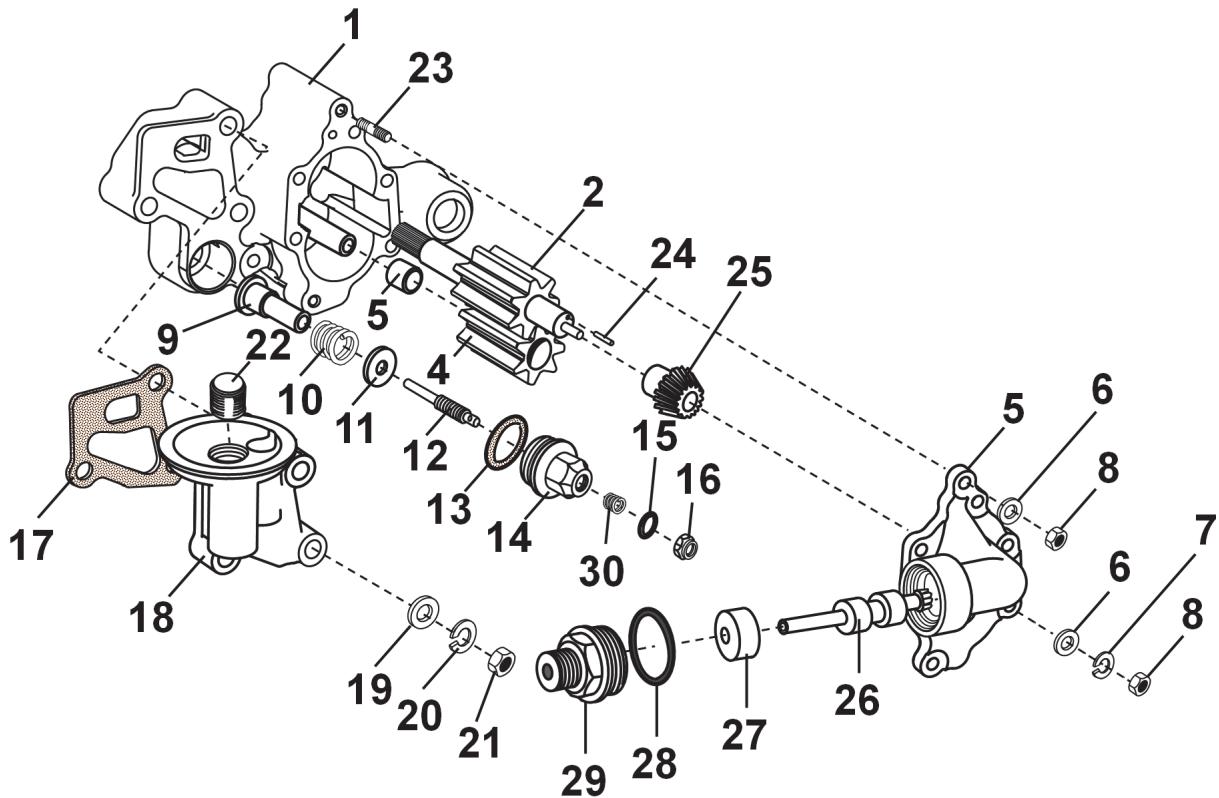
Oil Pump Assembly with Mechanical Tachometer Drive Adapter
